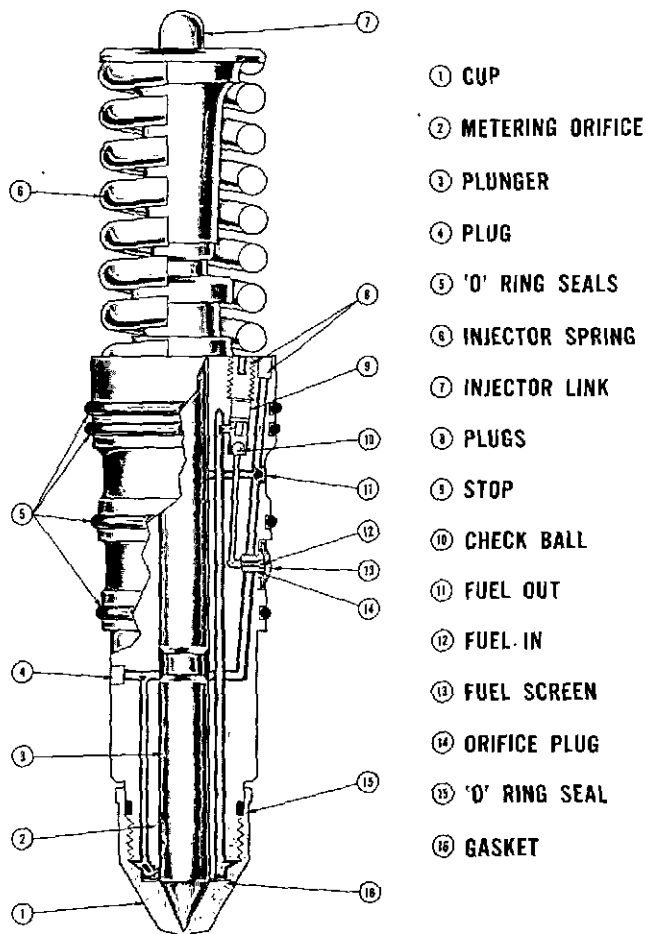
Cross section, cylindrical PT (type B) injector
